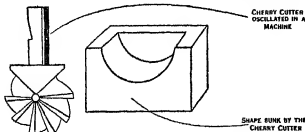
CHERRY CUTTER AND CROSS SECTION OF A DIE CUT THROUGH IN THE VERTICAL DIRECTION. AS EACH END OF THE CONCAVITY IS CLOSED THE CHERRY CUTTER IS NECESSARY TO MILL OUT THE CURVE.
